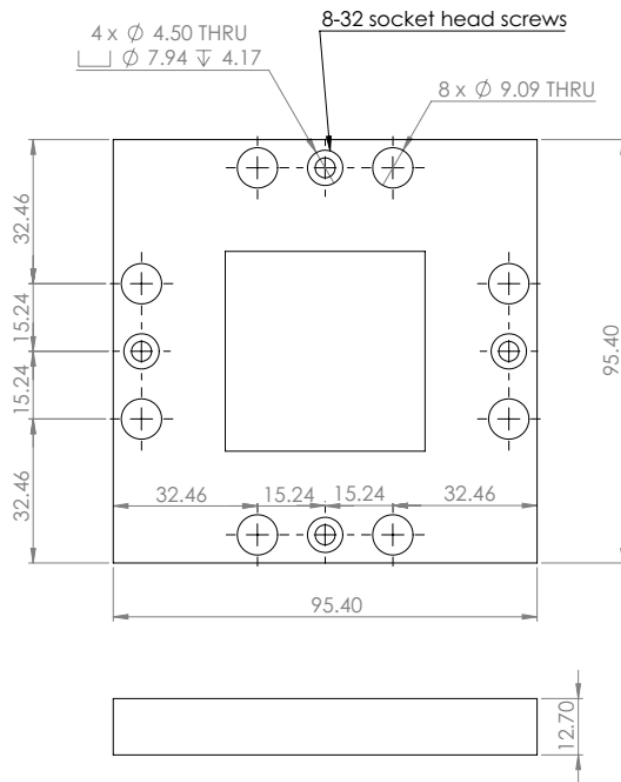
Technical drawings of the PEEK insulation used around the copper heater block. All dimensions are in millimeters.
